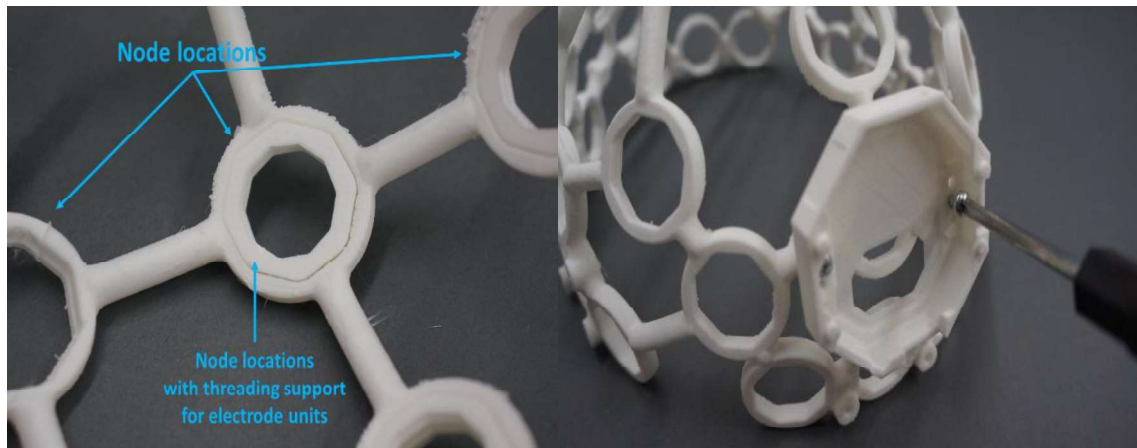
Assembling Ultracortex Mark IV: Fixing 3D printed parts together
